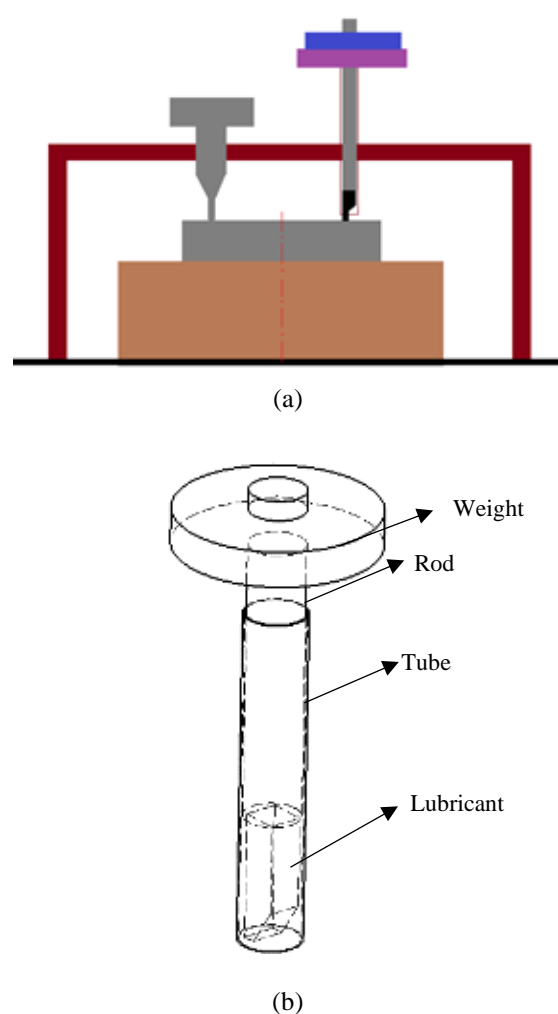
a) Gantry mechanism positioning and components, b) how to assemble components inside the tube of the applicator.
